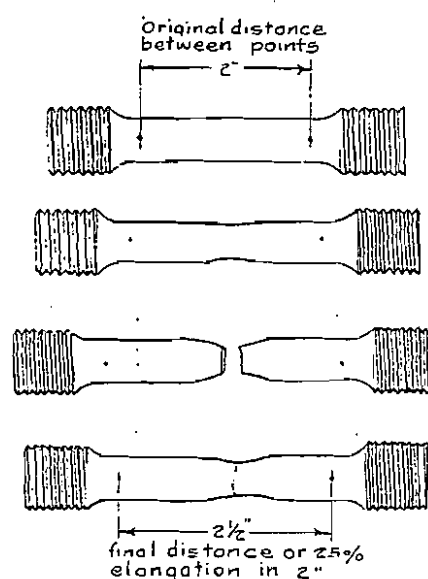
Tensile test specimen before and after testing to failure, showing maximum elongation.
